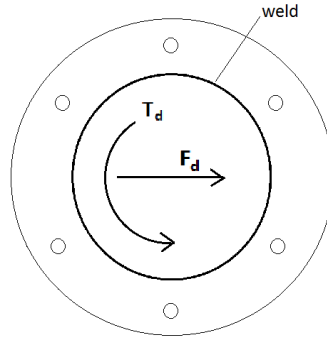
Detail drawing showing flange weld as designed
